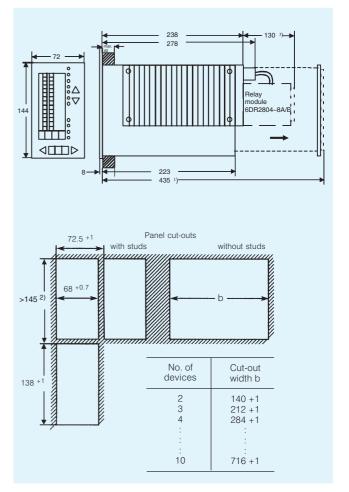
/16 SIPART DR22 controller and panel cut-outs, dimensions
